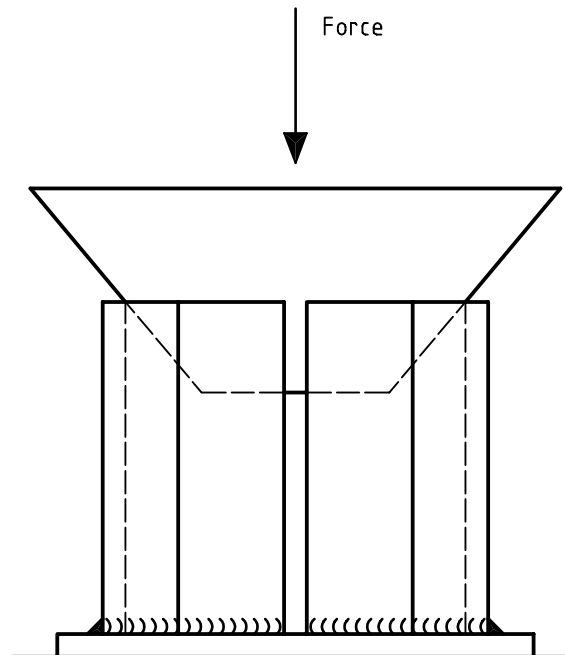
Preparation and fracture testing of test specimens for fillet welds on pipe
